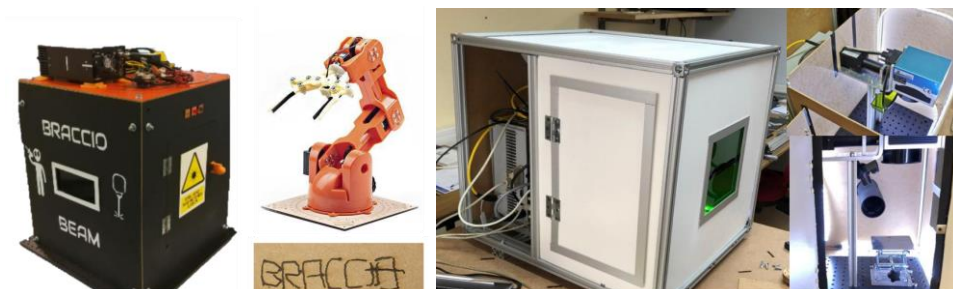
Left. BraccioBeam (2017-2018 course) laser with a robotic arm for 3D parts processing Right. Movilaser (2019-20) and LASERANGE(2020-21) laser engraving machine.
